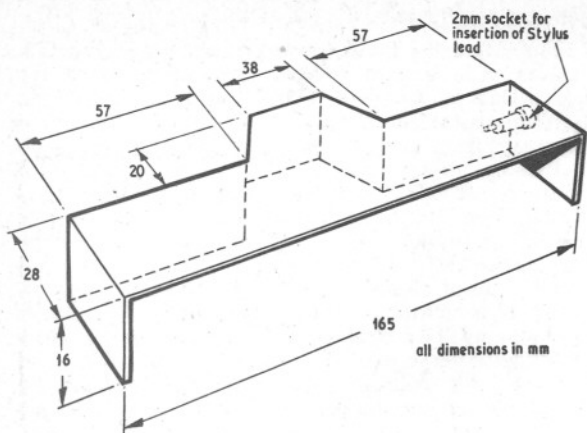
Dimensions of the keyboard cover which was made from 3mm card
